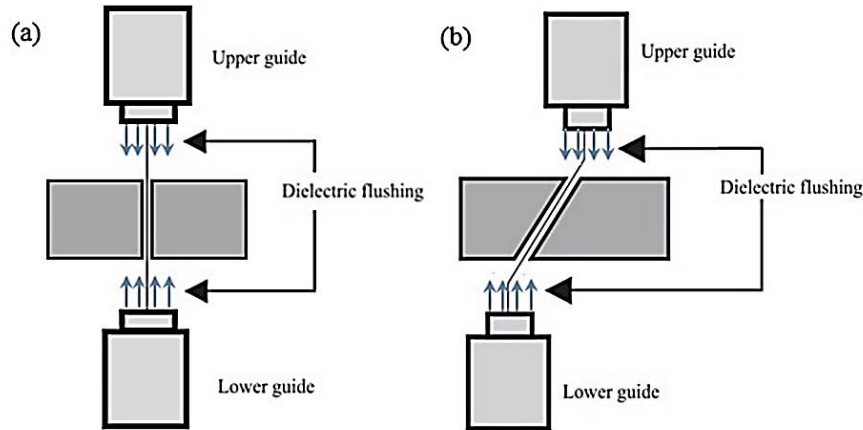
(a) Straight cut in WEDM (b) Shift of upper and lower guide's ways in taper cutting (Sanchez et al., 2016)
